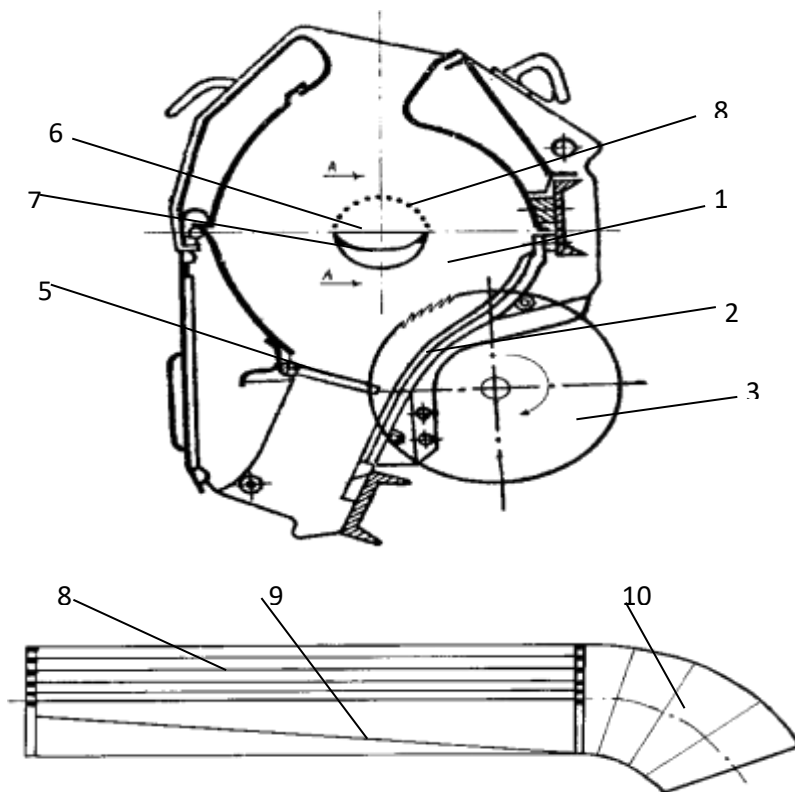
Rod and inclined plate mounted on an elastic element (base)
